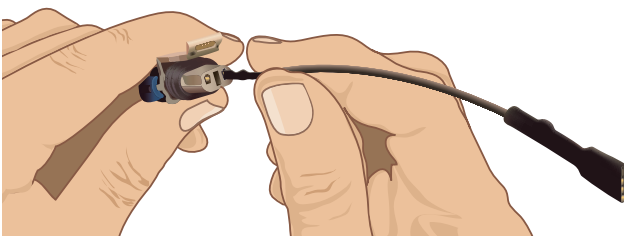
Check terminal or pin fit with the specified terminal tool.
